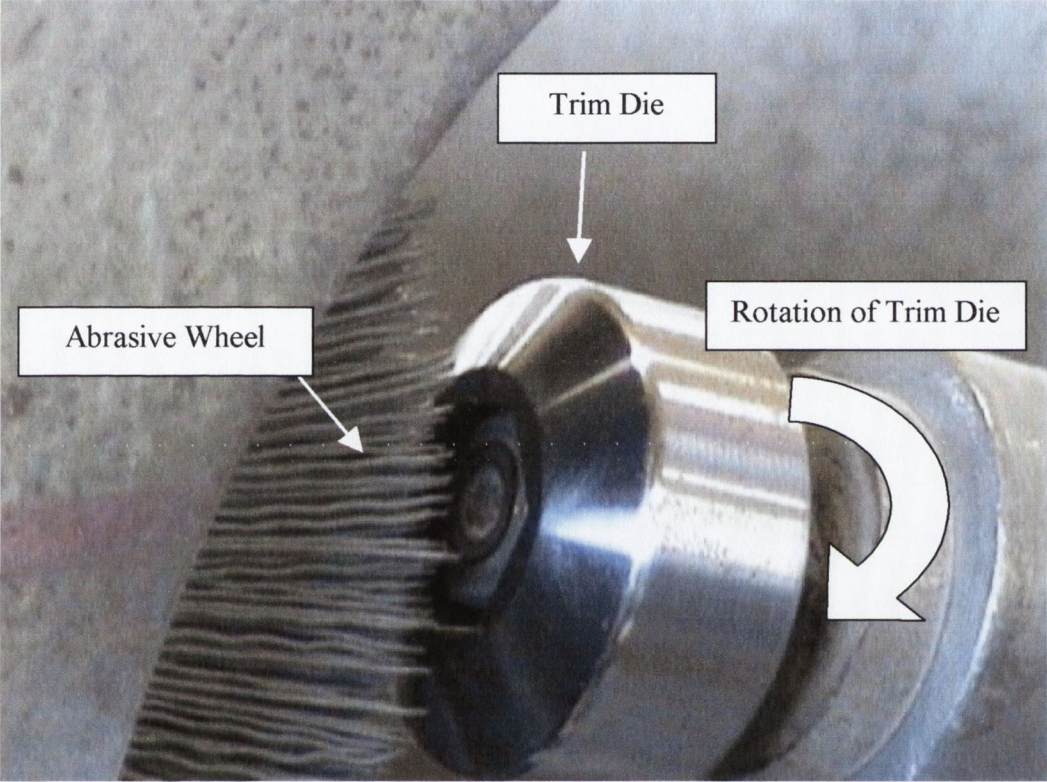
Edge Preparation of the Trim Die using an Abrasive Wheel
